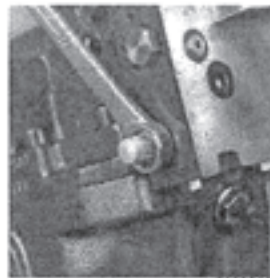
Remove PCOR Defeat Spool Plug or Fitting
